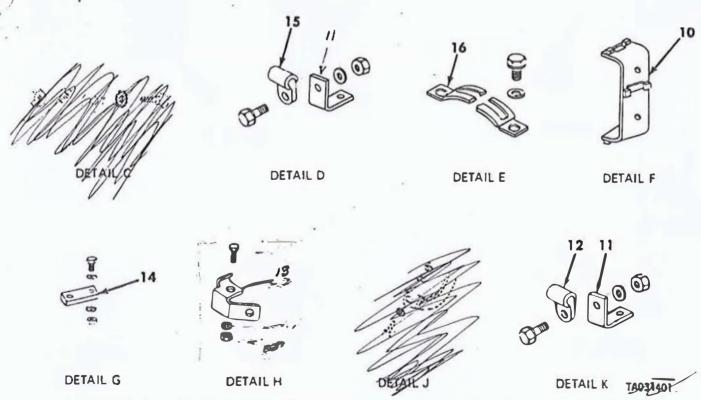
Engine wiring harness brackets and clamps (Sheet 2 of 3).
